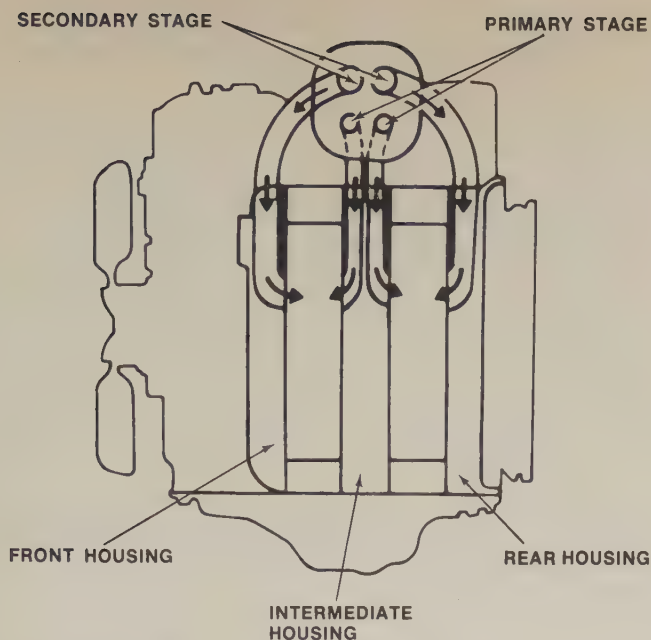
Schematic view of the carburetor. Note how the two carburetor stages supply air-fuel mixture to the intake ports in the three side housings. (Toyo Kogyo Company, Ltd.)
